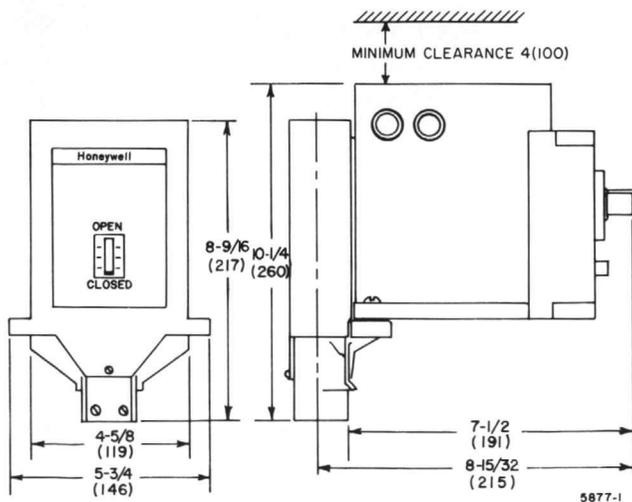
Q618 Linkage with Modutrol Motor Approximate Dimensions in Inches (Millimeters). Motor shown is representative, other motors may vary in size.
